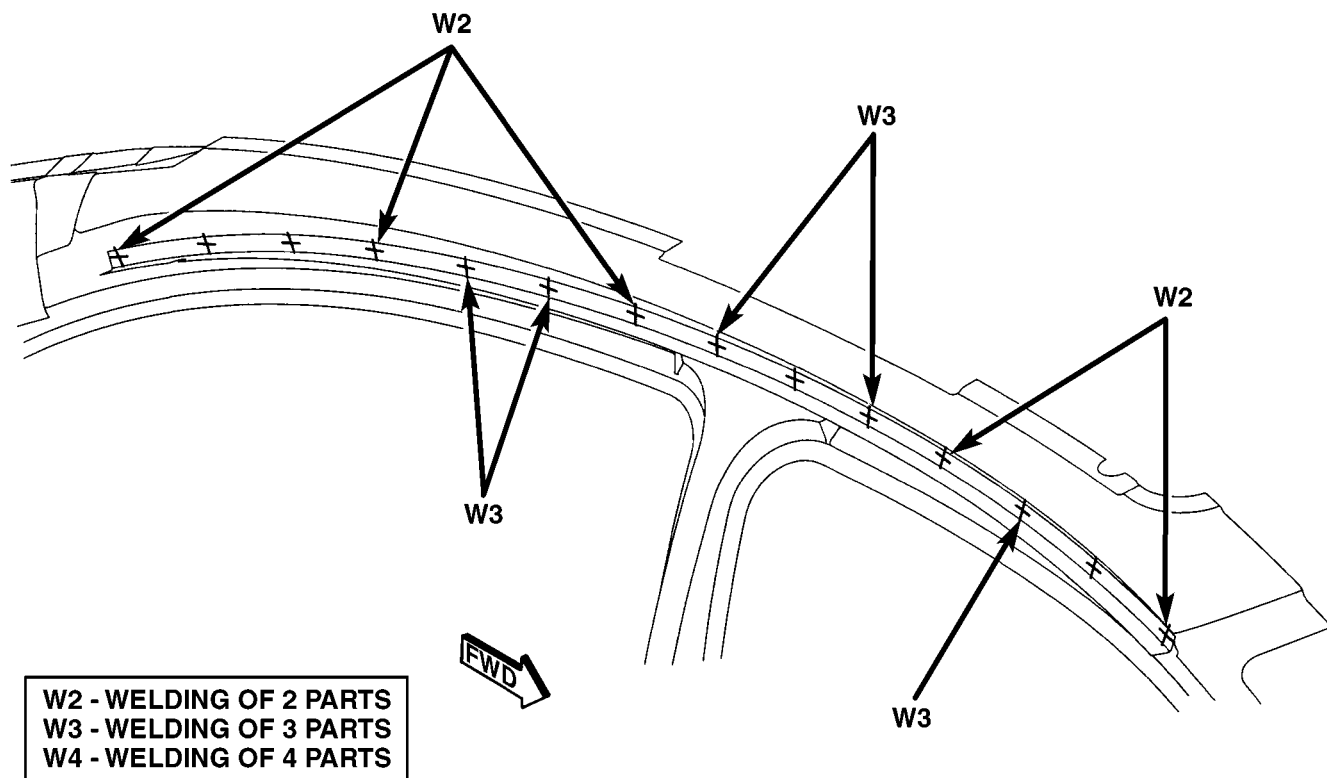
DRIP RAIL/ROOF SUPPORT TO BODY SIDE APERTURE
